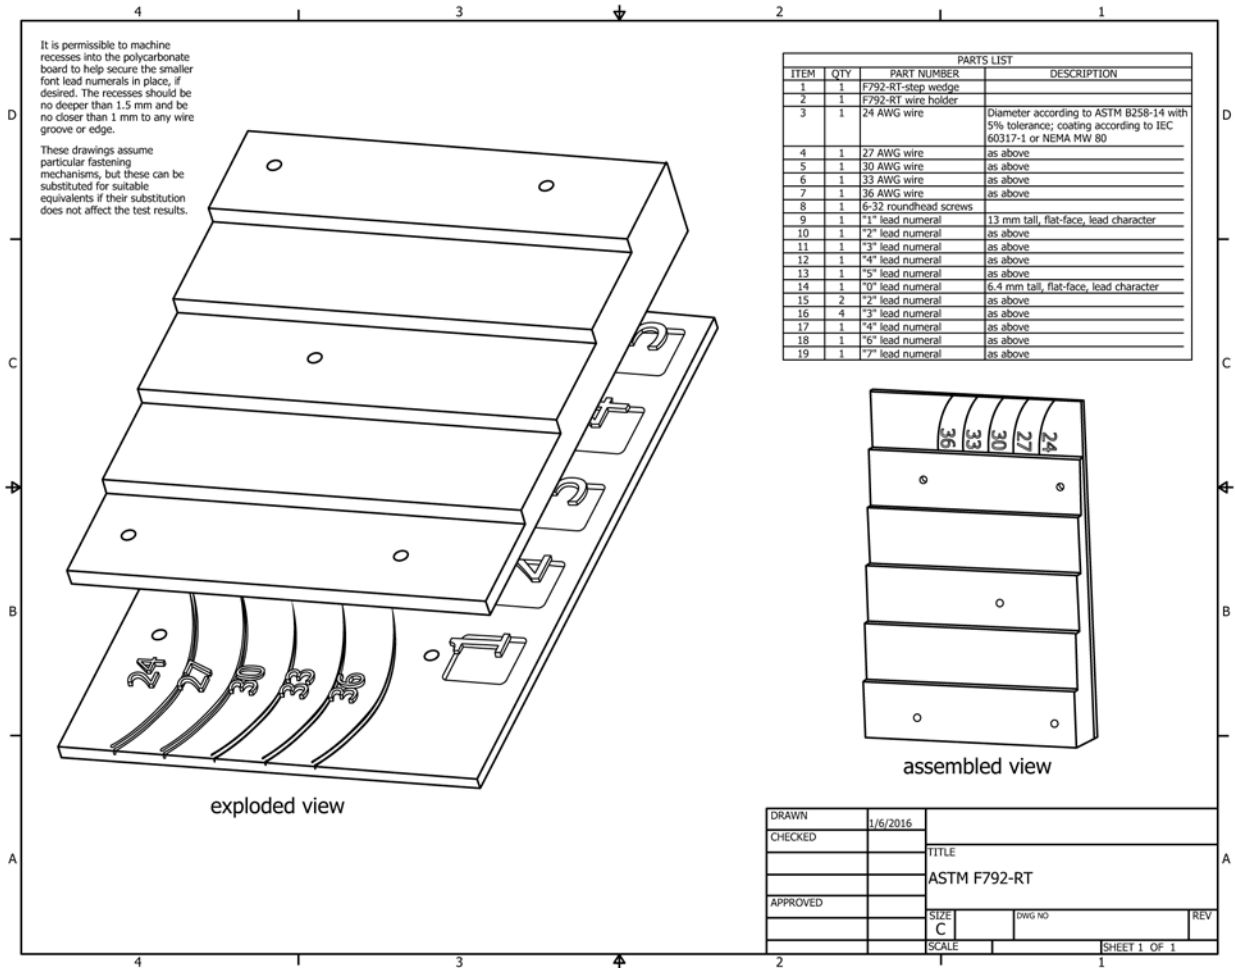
A Mechanical Drawing of the Practice F792 – RT Test Object with Assembled and Exploded Views
